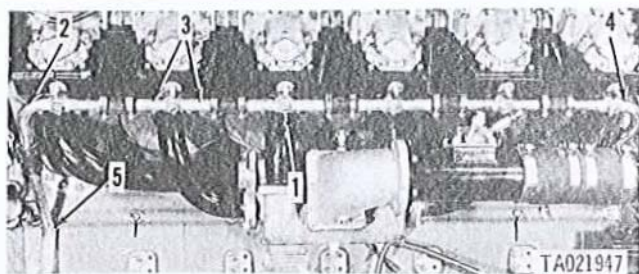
Removing or installing right rear cylinder head oil drain tube and turbosupercharger oil drain tube.
